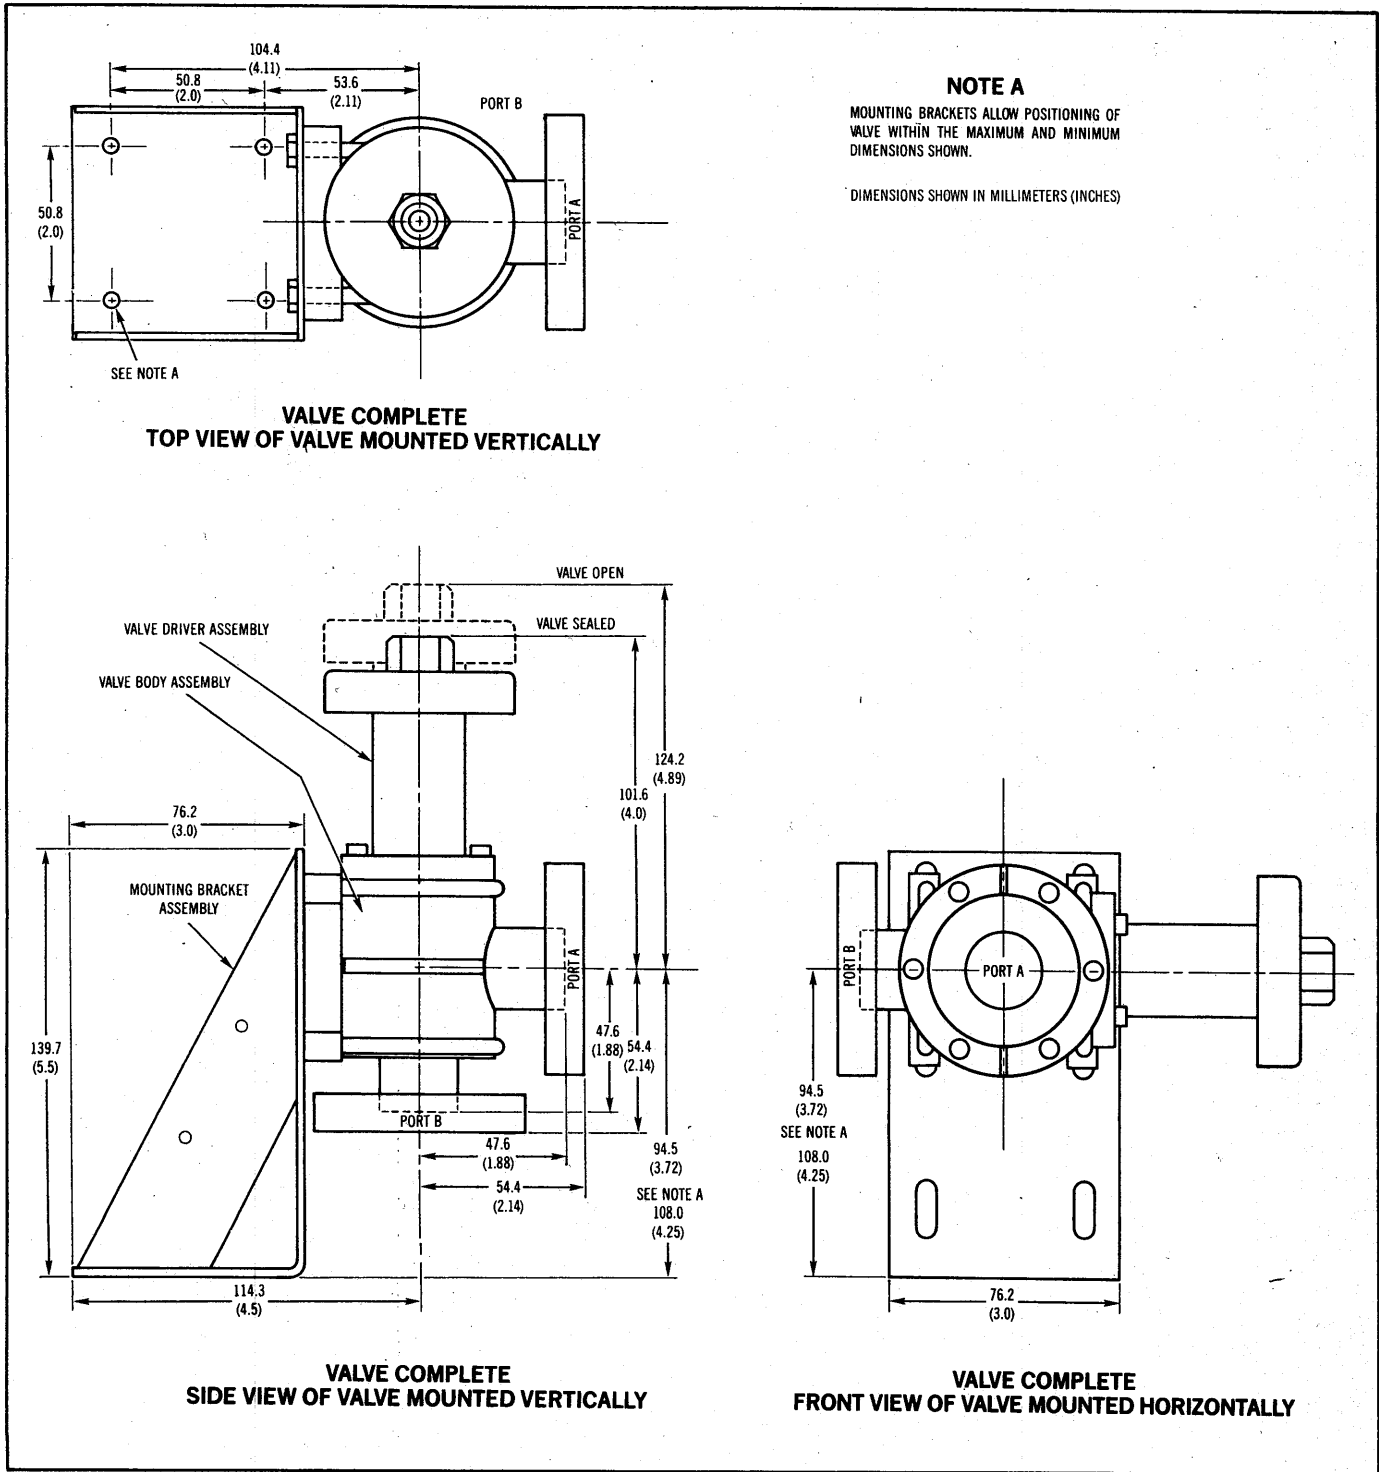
Mounting Dimensions for Series 204 Gold Seal Valves
